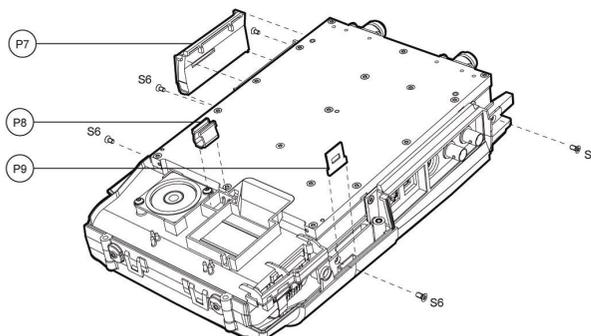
Replacing the Side Part Left, Side Part Right, Stand Up Lock Spring and Kensington Plate.
